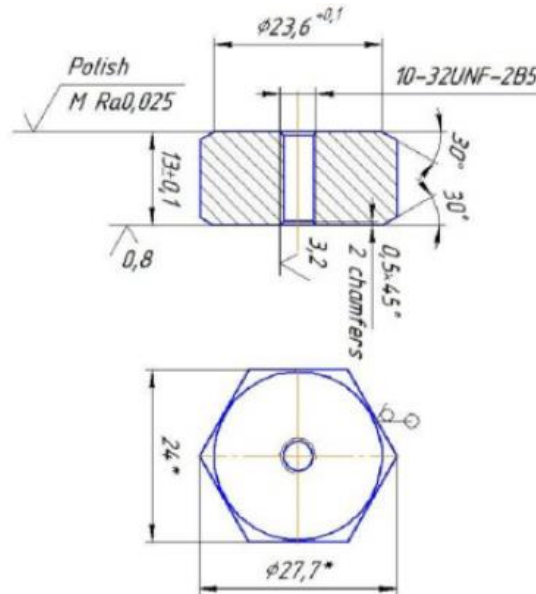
Mechanical adapter for SE type accelerometer (all dimensions in mm)
